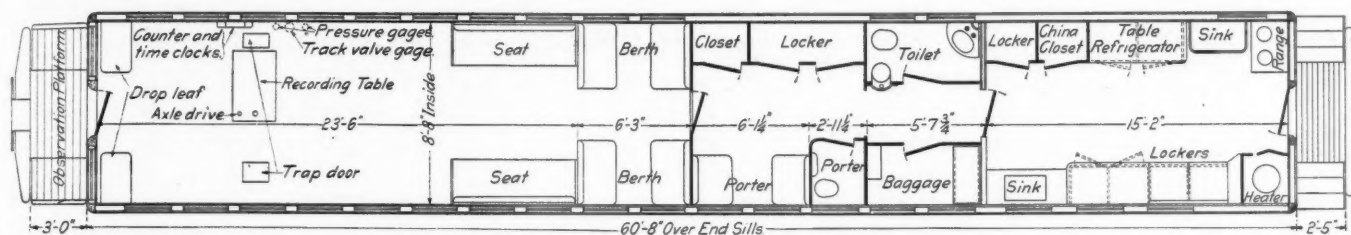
Erie Track Inspection Car, Floor Plan.
